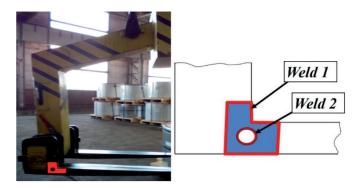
Reinforcement plate position on the forklift – the forklift structure (left) and the detail of the plate with welded joints (right).
